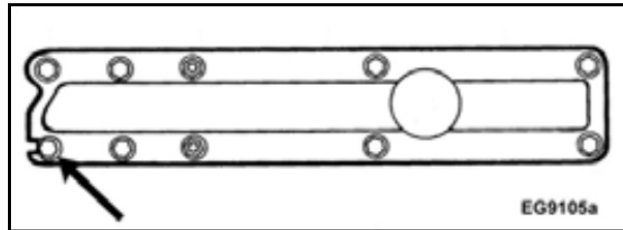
Right Intake Manifold Cover Slotted Bolt Hole
